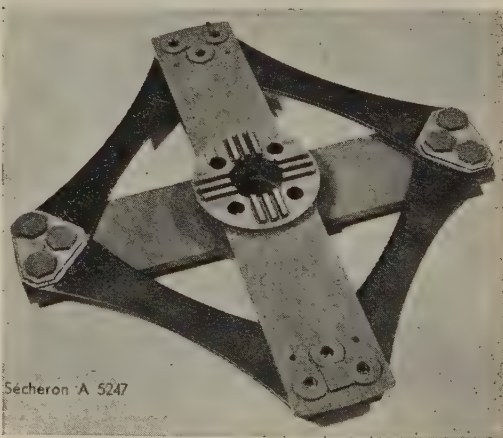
Special rubber and grooved coupling for Sécheron IV mechanism. This coupling is fitted for motor powers of 200 to 1 000 H.P. and above (locomotives).
